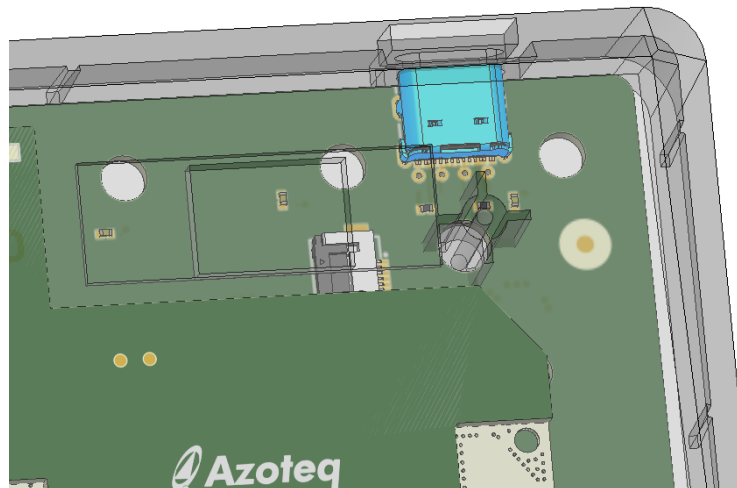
CAD Assembly Of PCBA Fitted Inside Case To Confirm Connector And Support Feature Alignment
